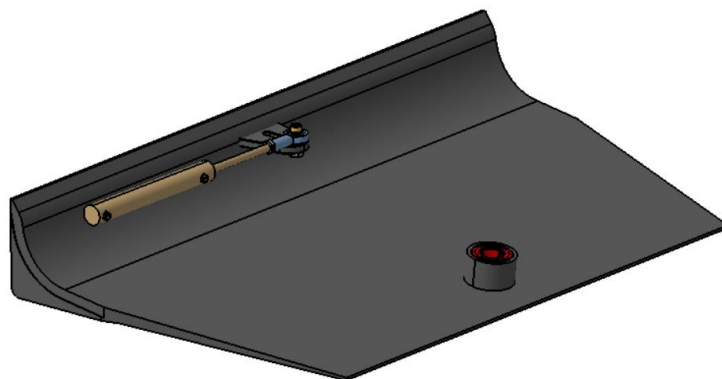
Rear isometric view of the diffuser assembly prototype [own elaboration, 2021]
